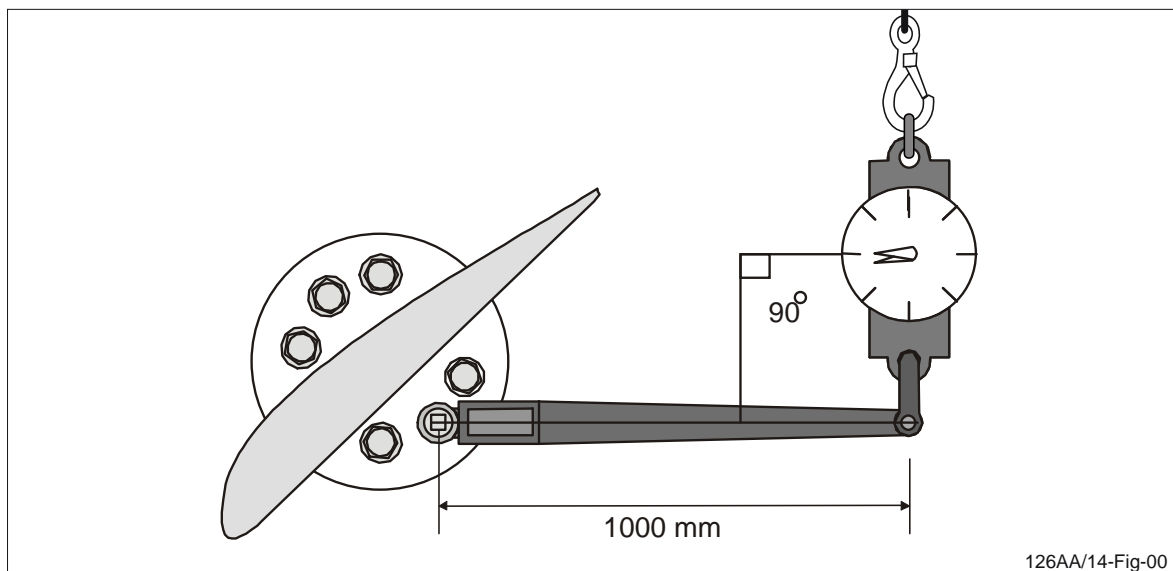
Alternative 1: Tension tester and dynamometric wrench attached to a blade bolt.
